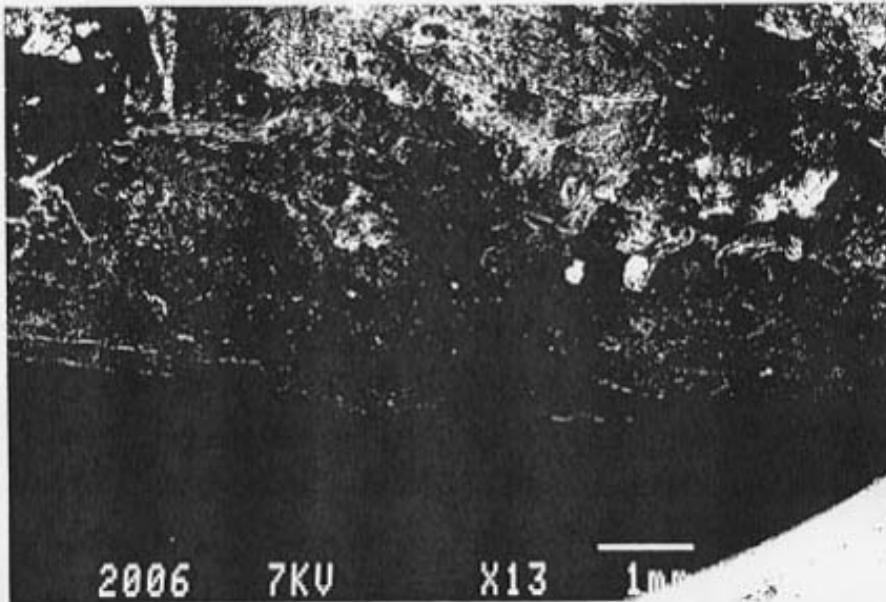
Ratched marks from fatigue crack initiation at hull mating lug P2
